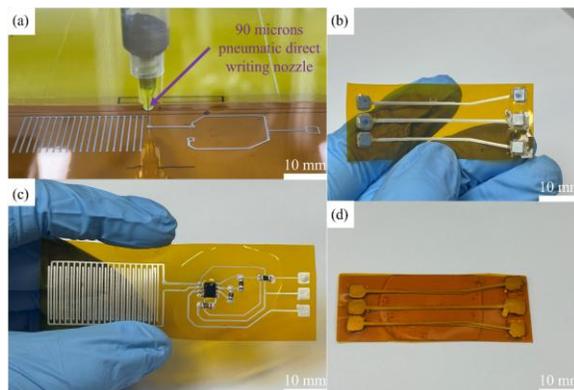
(a) Pneumatic Direct Writing Process, (b) Single Layer Plug-and-Play Modules, (c) Final Capacitive Sensing Module. (b) Single Layer Plug-and-Play Modules, (d) Double-layer Connection Plug-and-Play Module.
